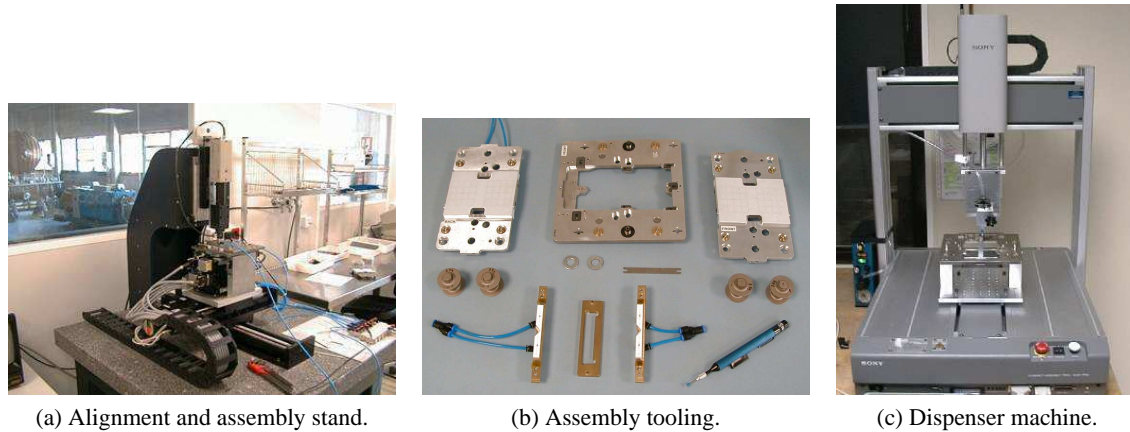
Alignment, assembly and gluing apparatuses for module building.
